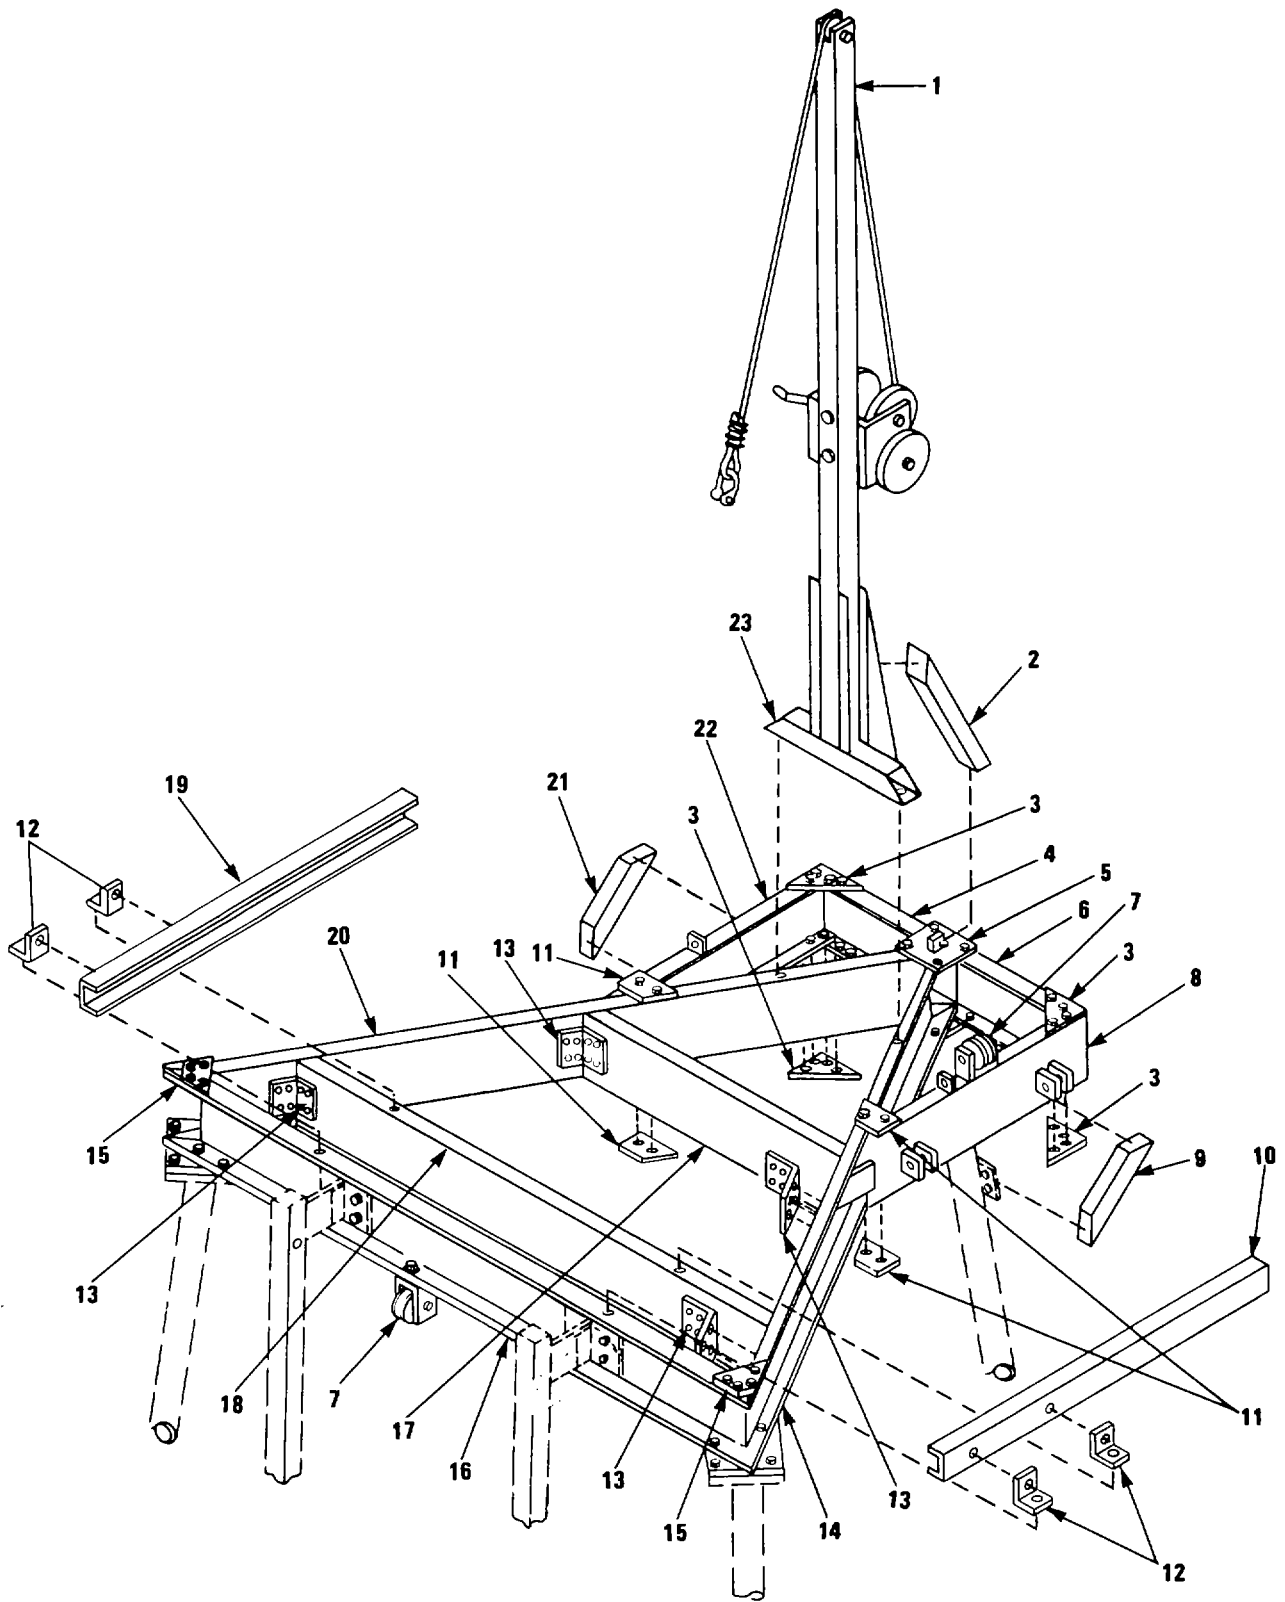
Tower Adapter Installation (Sheet 1 of 4)
